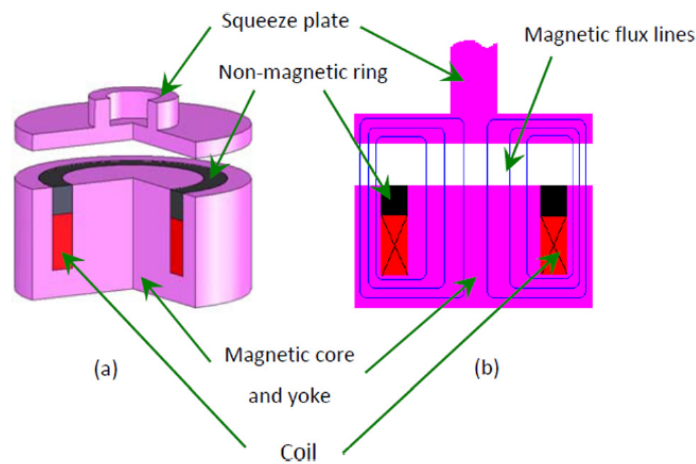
Inner coil subassembly for squeeze mode: (a) Isometric section view and (b) front section view
